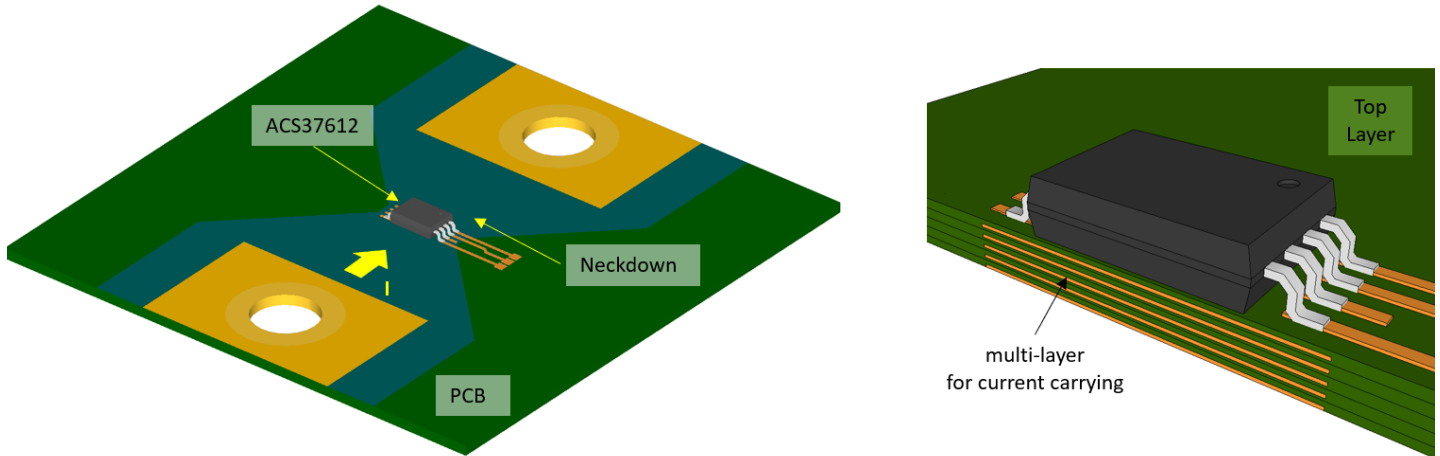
PCB Current sensing application – 6-Layer reference PCB example
